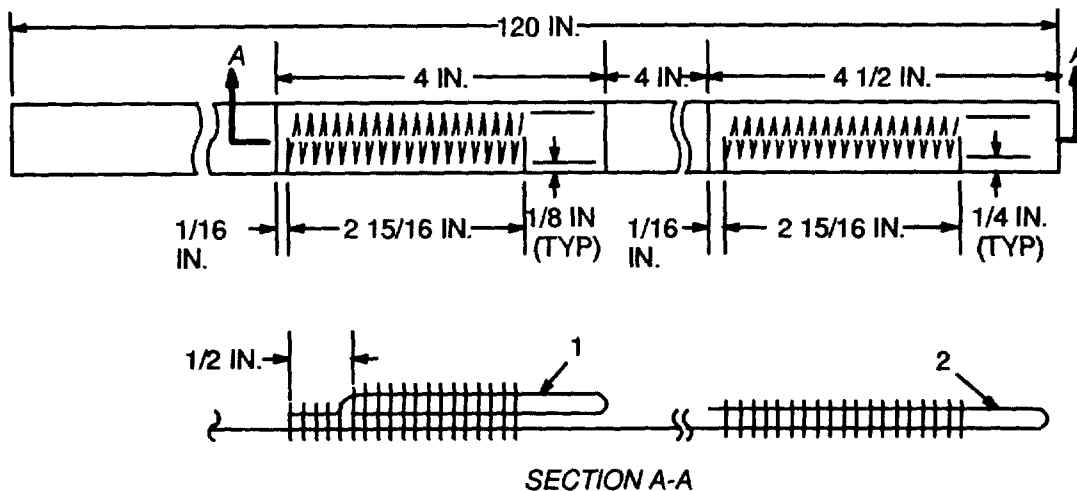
Typical Arming Wire Lanyard Construction Details.
